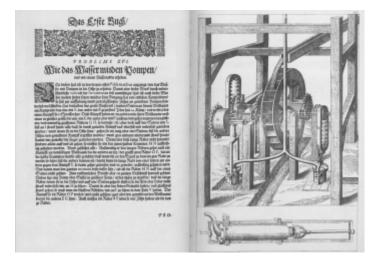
Presentation of pumps in a printed machine book. Below a separate drawing to emphasize technical details of the arrangement to drive the pumps' pistons. (Caus 1615, fol. 23^r.)
